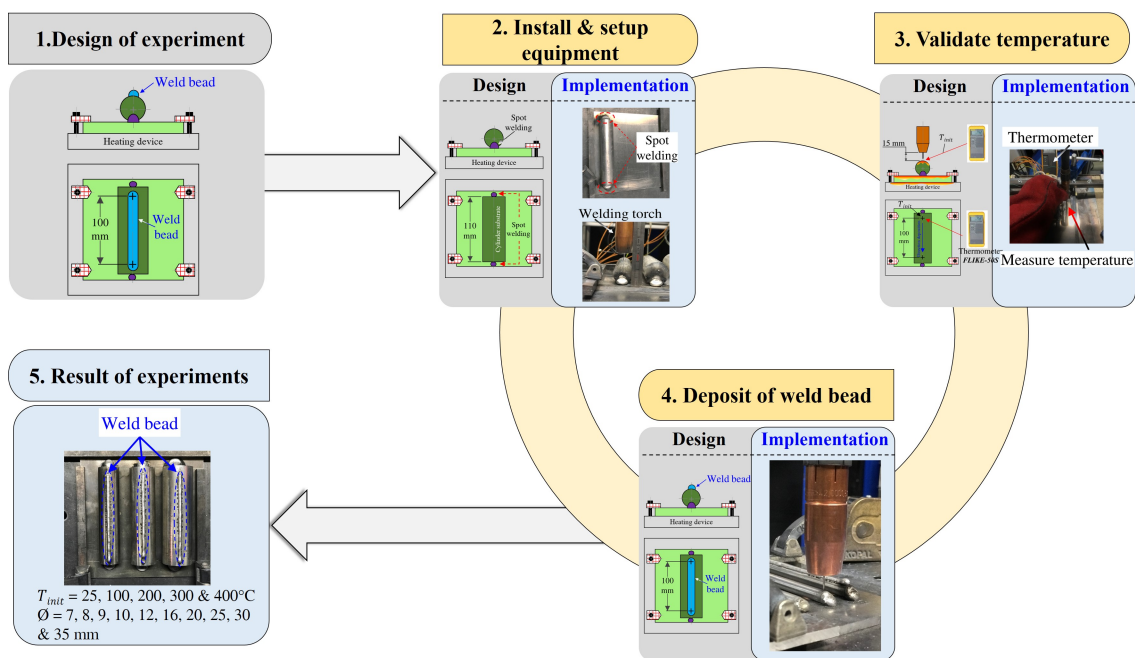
Design of experiment of single weld bead on cylinder substrate
